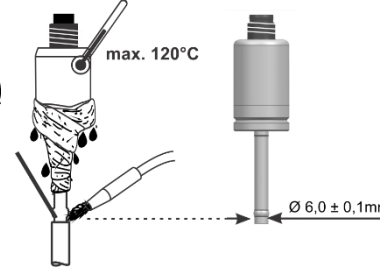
/ Рис. 5: PT4-Mxx Series Cable Assembly
